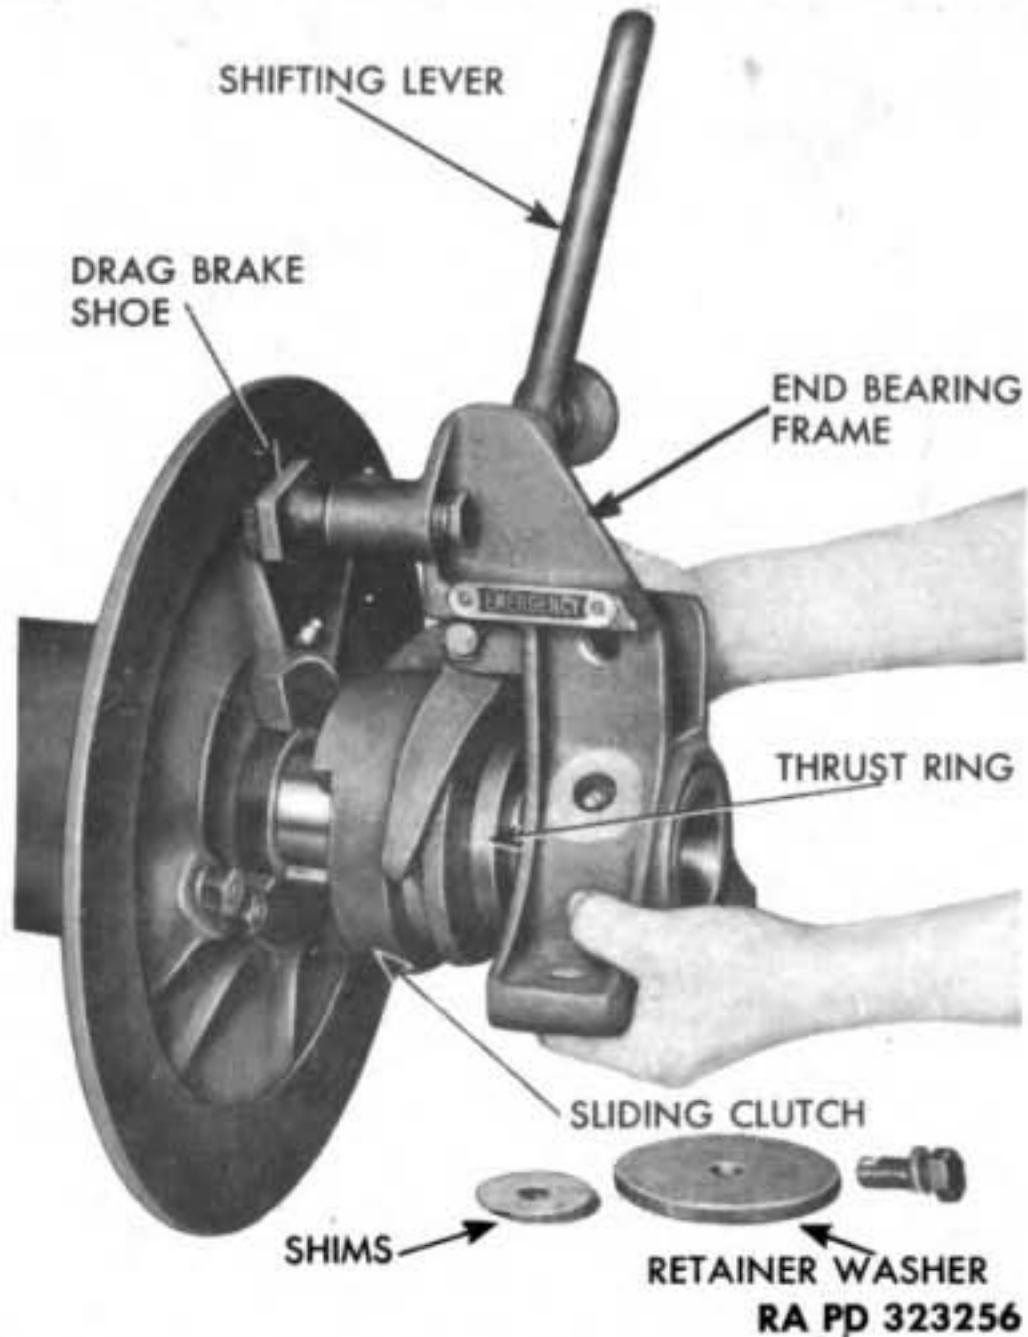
Removing End Bearing Frame and Sliding Clutch
